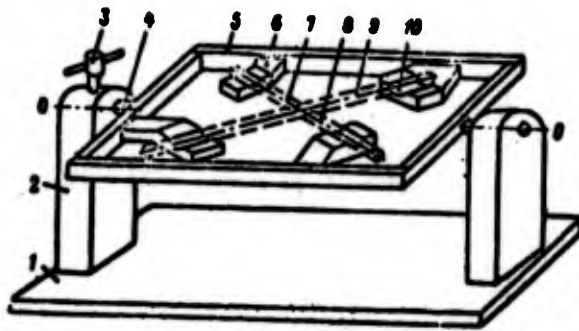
Device for the welding of a crosspiece: 1 - base; 2 - brace; 3 - stopper; 4 - axle; 5 - frame; 6 - stops; 7, 8, 9 - elements to be welded; 10 - bed.
